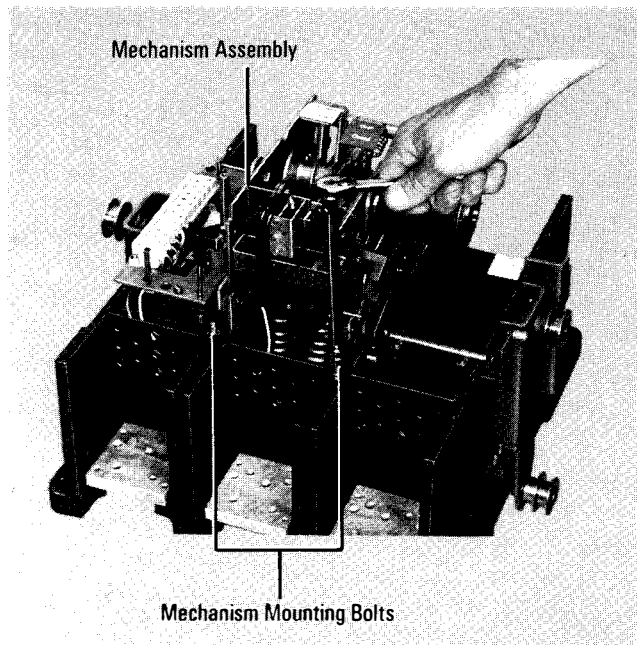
Removal of Mechanism Bottom End Mounting Bolts From a 1600 Amp Breaker.
